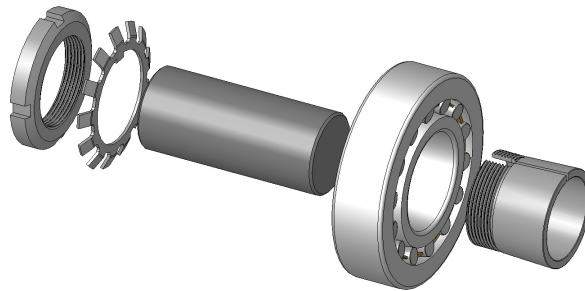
Exploded view of all components for mounting a rolling bearing with conical inner ring on a shaft by means of an adapter sleeve. Arranged from left to right are locknut, locking plate, section of shaft, rolling bearing, adapter sleeve.
